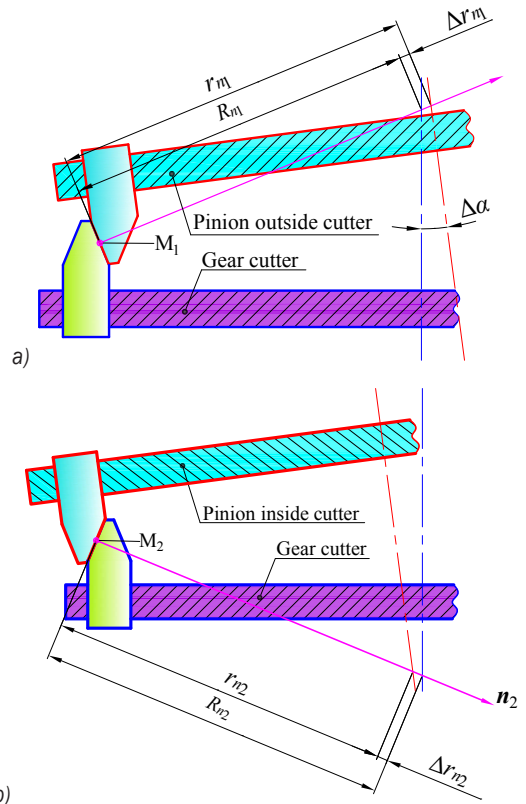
Relative position of gear and pinion cutters in five-cut process; a) drive side and b) coast side
